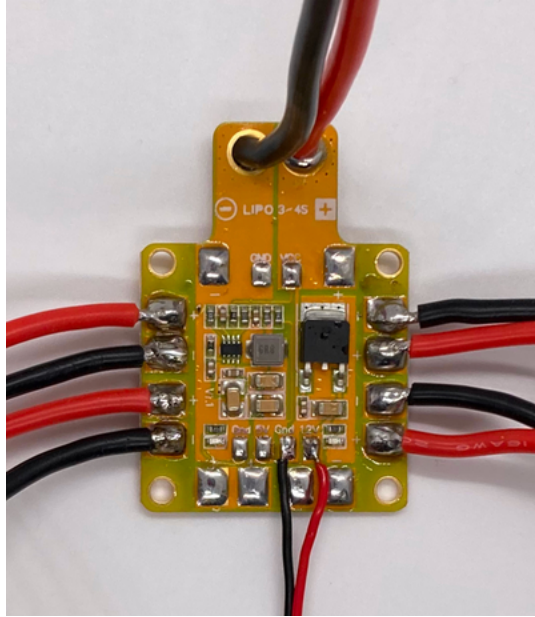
ESCs cables soldered to the PDB on the side pads.
